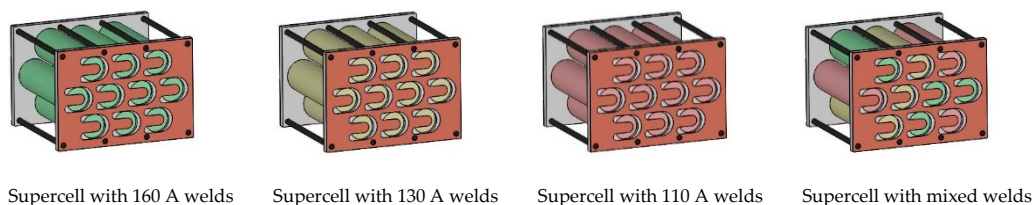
Supercells joined with 160 A, 130 A, 110 A, and a mixture of welding currents.
